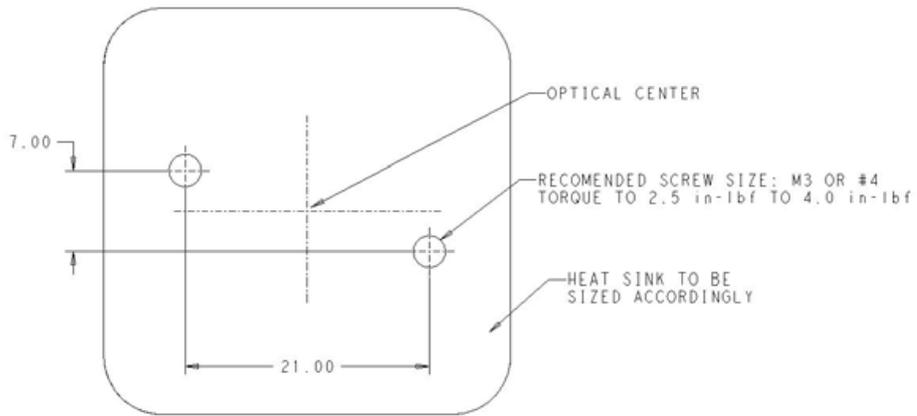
Reference layout and dimensions of the holes that need to be drilled into the heat sink to align and secure the LUXEON H emitter with the TE Connectivity LED Holder, Type LH. All dimensions are in mm.
